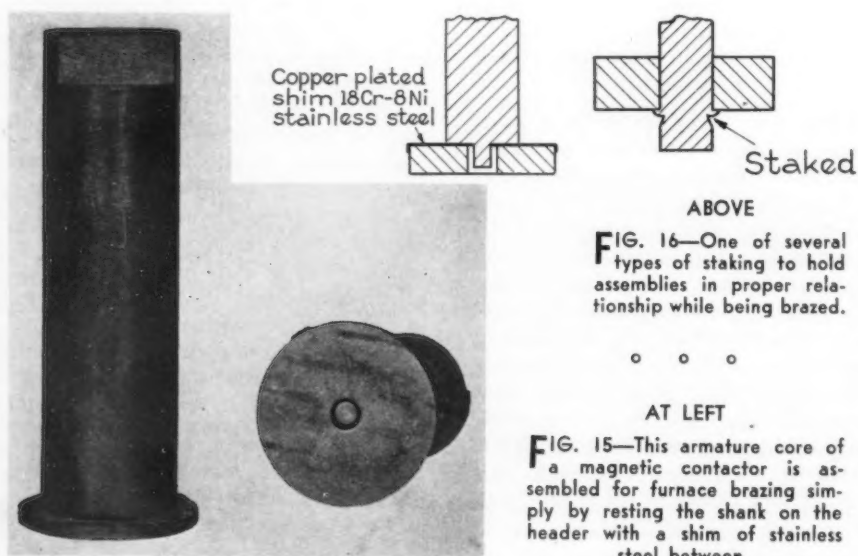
One of several types of staking to hold assemblies in proper relationship while being brazed.
